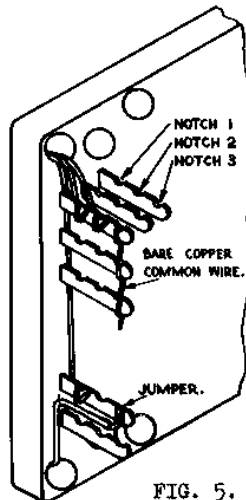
TERMINATIONS ON MOULDED TYPE BLOCK.
